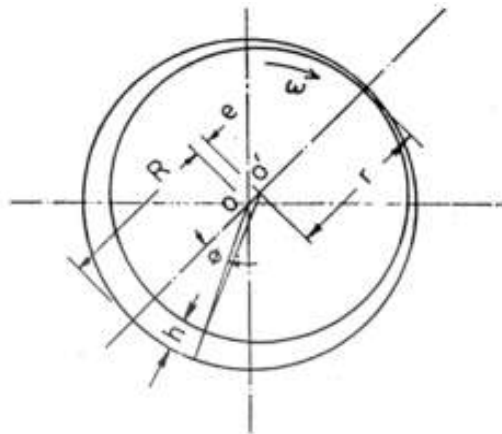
DETAILS OF JOURNAL, BEARING & LOADING ARRANGEMENT
